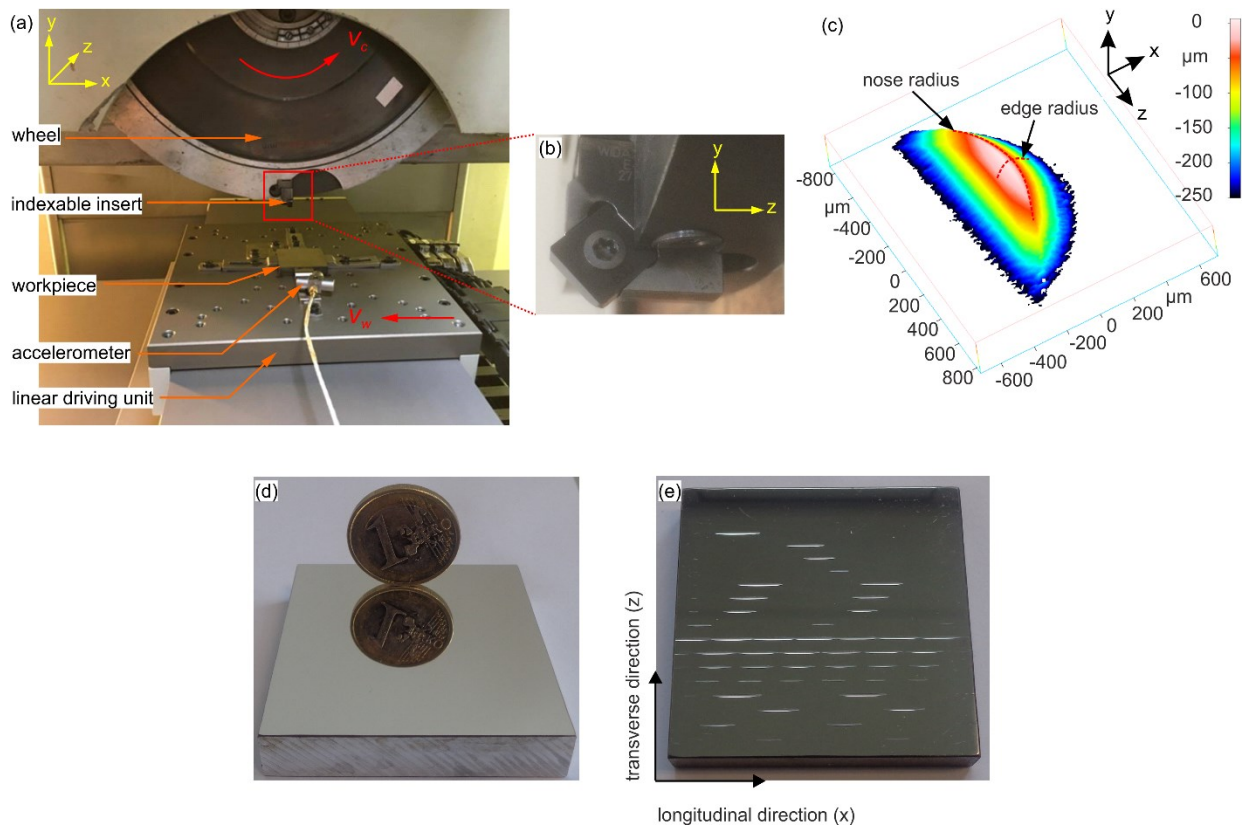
(a) experimental setup for rotating single grit scratch tests (b) close view of the utilized indexable insert (c) 3D view of the cutting edge (d) mirror polished workpiece surface before experiments (e) scratches on the work surface after experiments
